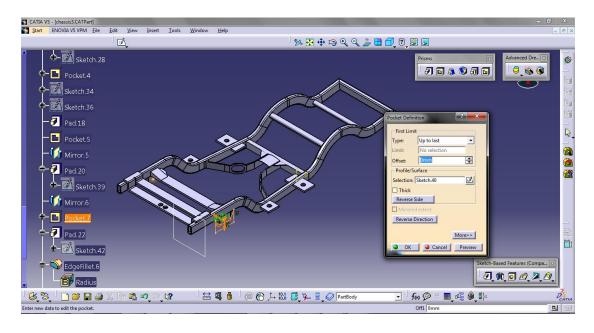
Used Pocket Tool For The Side Rails In Chassis
